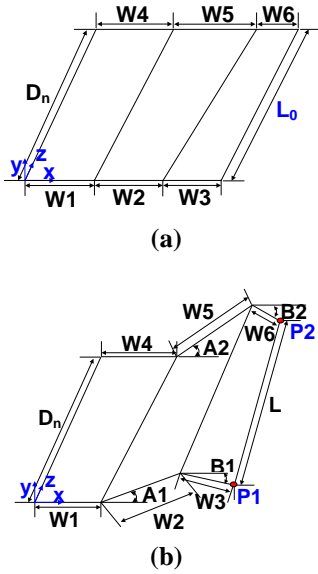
Schematic of profile change during flexible roll forming process; (a) initial blank, (b) formed blank
